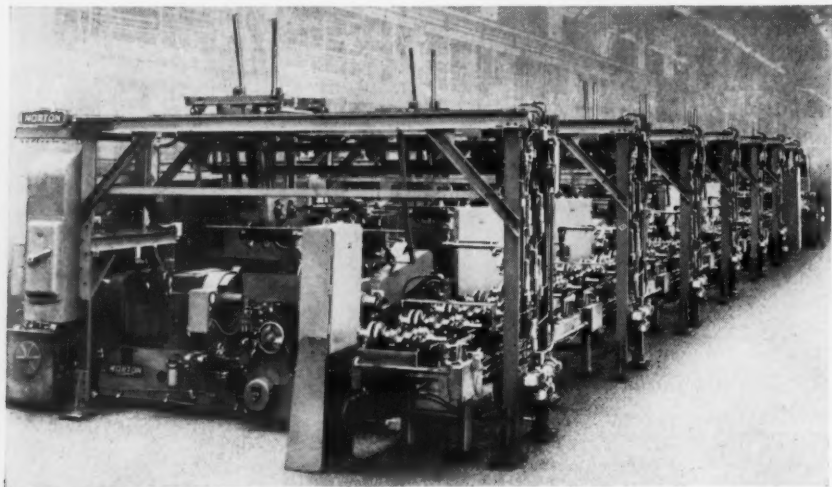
The Norton No. 2 Unitized Transfer Type Automatic Crankpin Grinder
